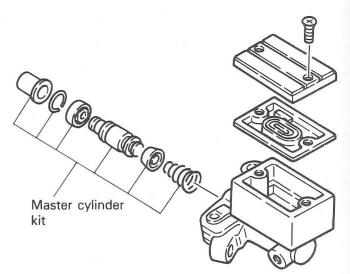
YTZ 250 brake master cylinder components — exploded view (Sec 12)
